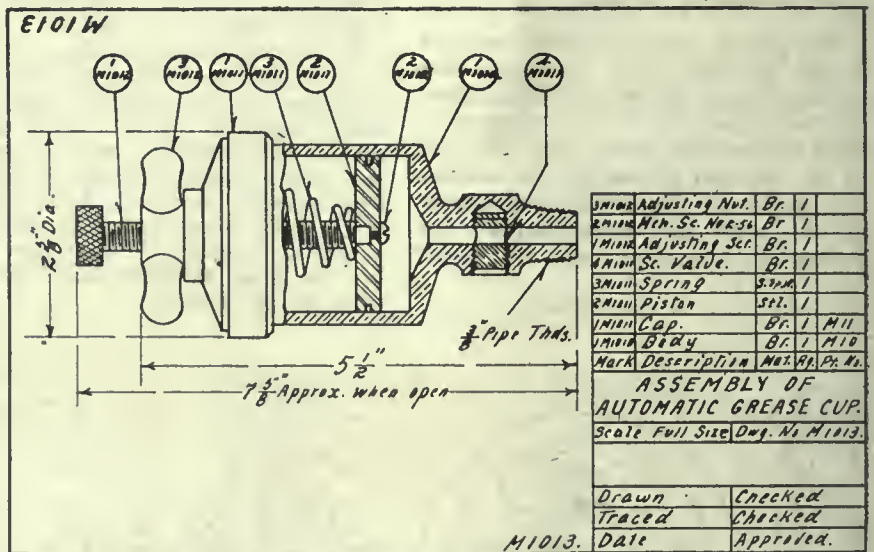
ASSEMBLY DRAWING OF A GREASE CUP, ILLUSTRATING THE PRINCIPLE AND DETAIL VIEWS.
